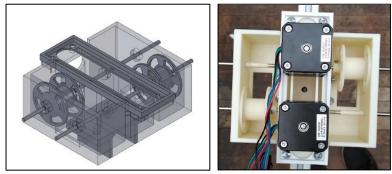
(left) & 6b (right)- SolidWorks assembly model and picture of final secondary gantry housing developed by the 2019 BELM group; assembly mounts to frame sections shown in Figs 2a & b and raises/lowers flower mechanisms in Figs. 4a & b [2].
